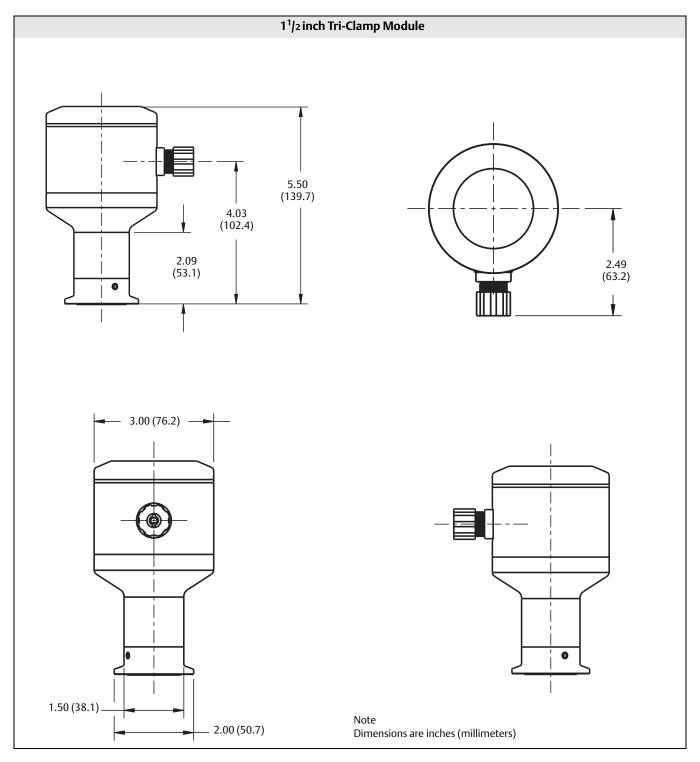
Rosemount 4500 Hygienic Pressure Transmitter Dimensional Drawings
